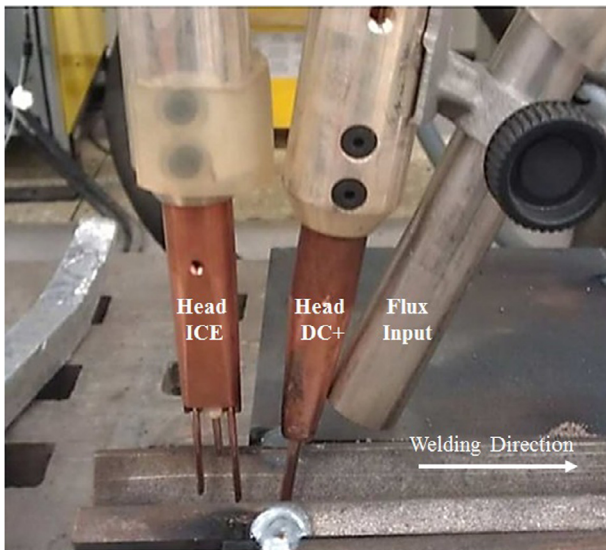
Equipment configuration for high heat input SAW welding.
